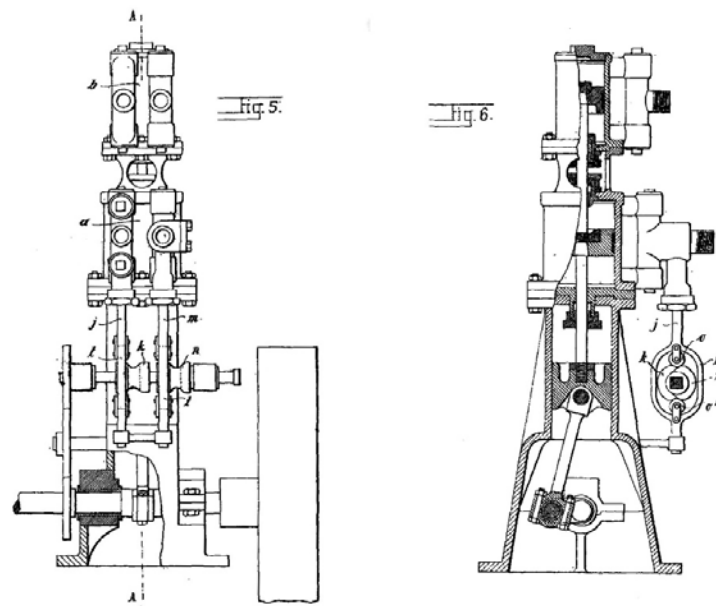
The engine with hot air and closed circuit, with double-acting pistons and driven in tandem. Source: Patent GB 27,033 /1909 “An Improved System of Hot Air Engine with Closed Circuit” [16].
